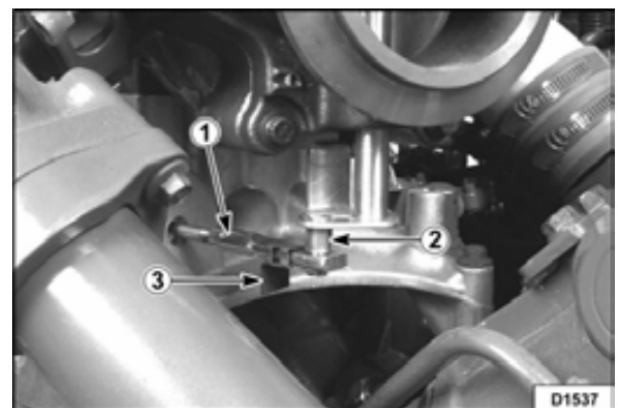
Connecting EBP Piston Rod (1998 and Up Model Years Shown)
